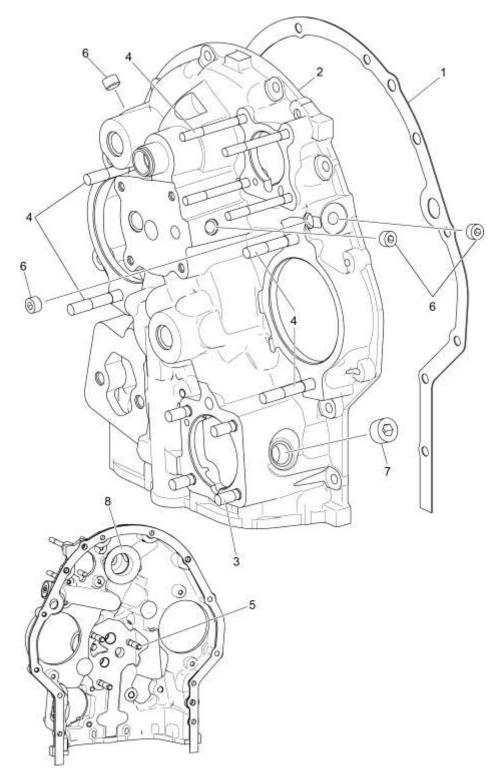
A Accessory Housing Assembly (D1A6 and D3A6)
